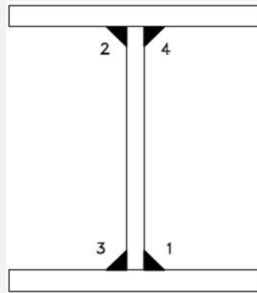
Sequence of fillet welding for fabricating the I-section
